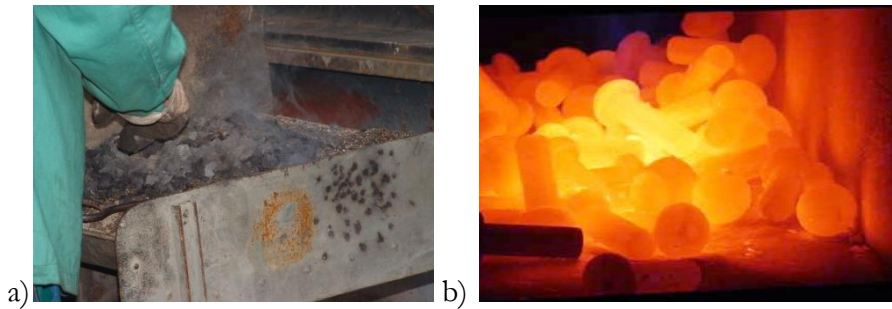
Heating of rivets: a) forge; b) red hot rivets (Vermes, 2007).
